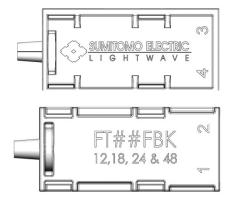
Top: Breakout Assembly Base Unit print Bottom: Breakout Assembly Cover
